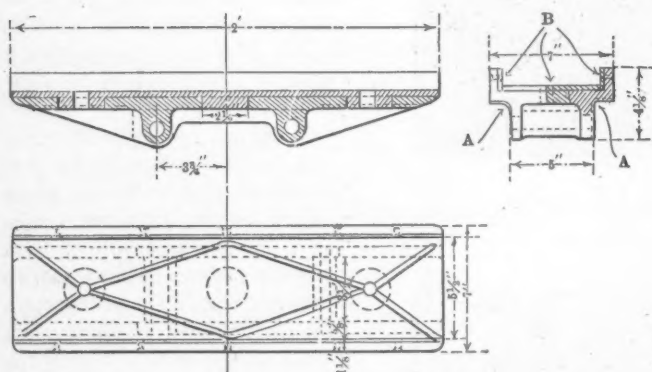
CAST STEEL CROSS-HEAD SHOES.
